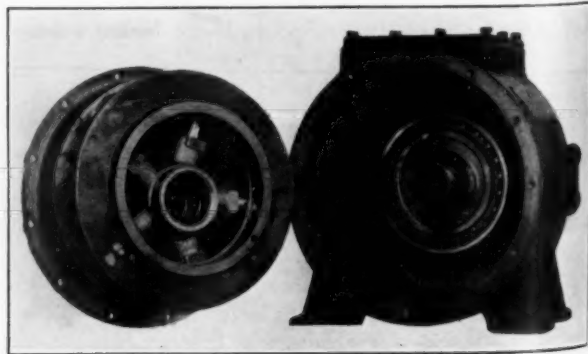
INTERIOR VIEW OF MOTOR SHOWN IN FIG. 9
